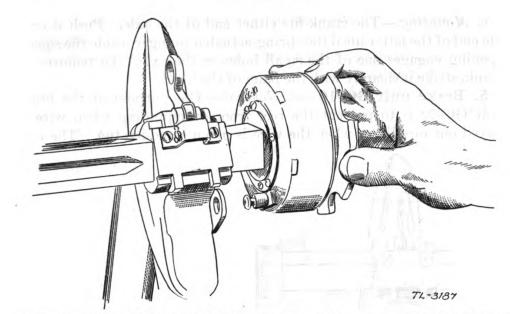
To mount brake unit GC-10, slide it over the axle so that button lines up with lip on frame.
